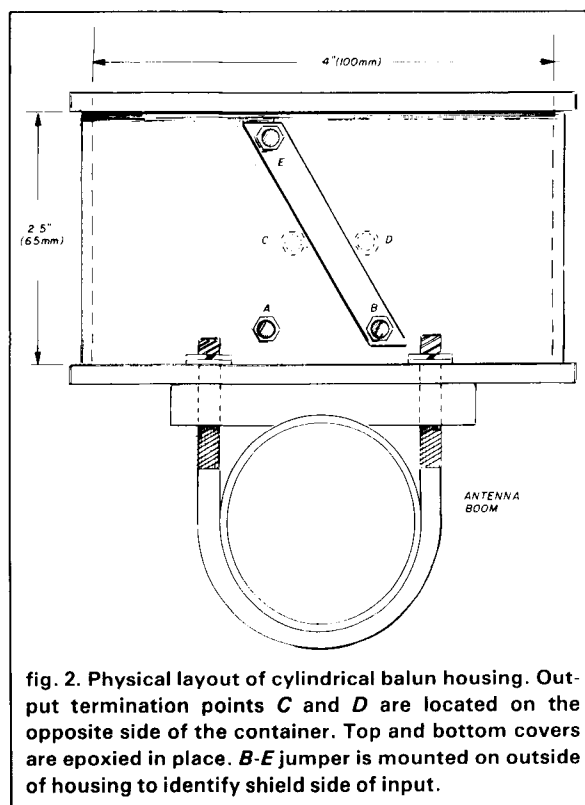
Physical layout of cylindrical balun housing. Output termination points C and D are located on the opposite side of the container. Top and bottom covers are epoxied in place. B-E jumper is mounted on outside of housing to identify shield side of input.
